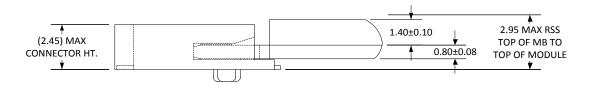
H2.5-S3 - Stack-up Top Mount Single-sided Module for 1.5 Maximum Top-side Component Height and with Higher Clearance above Motherboard
